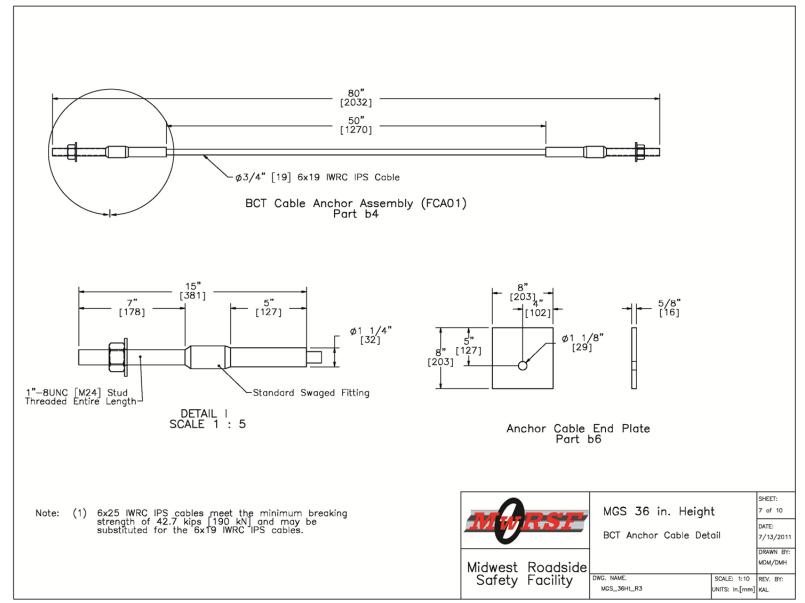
BCT Anchor Cable Details, Test No. MGSMRH-2
